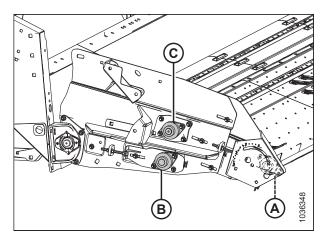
Bearings with Grease Fittings – Right Side of Header
